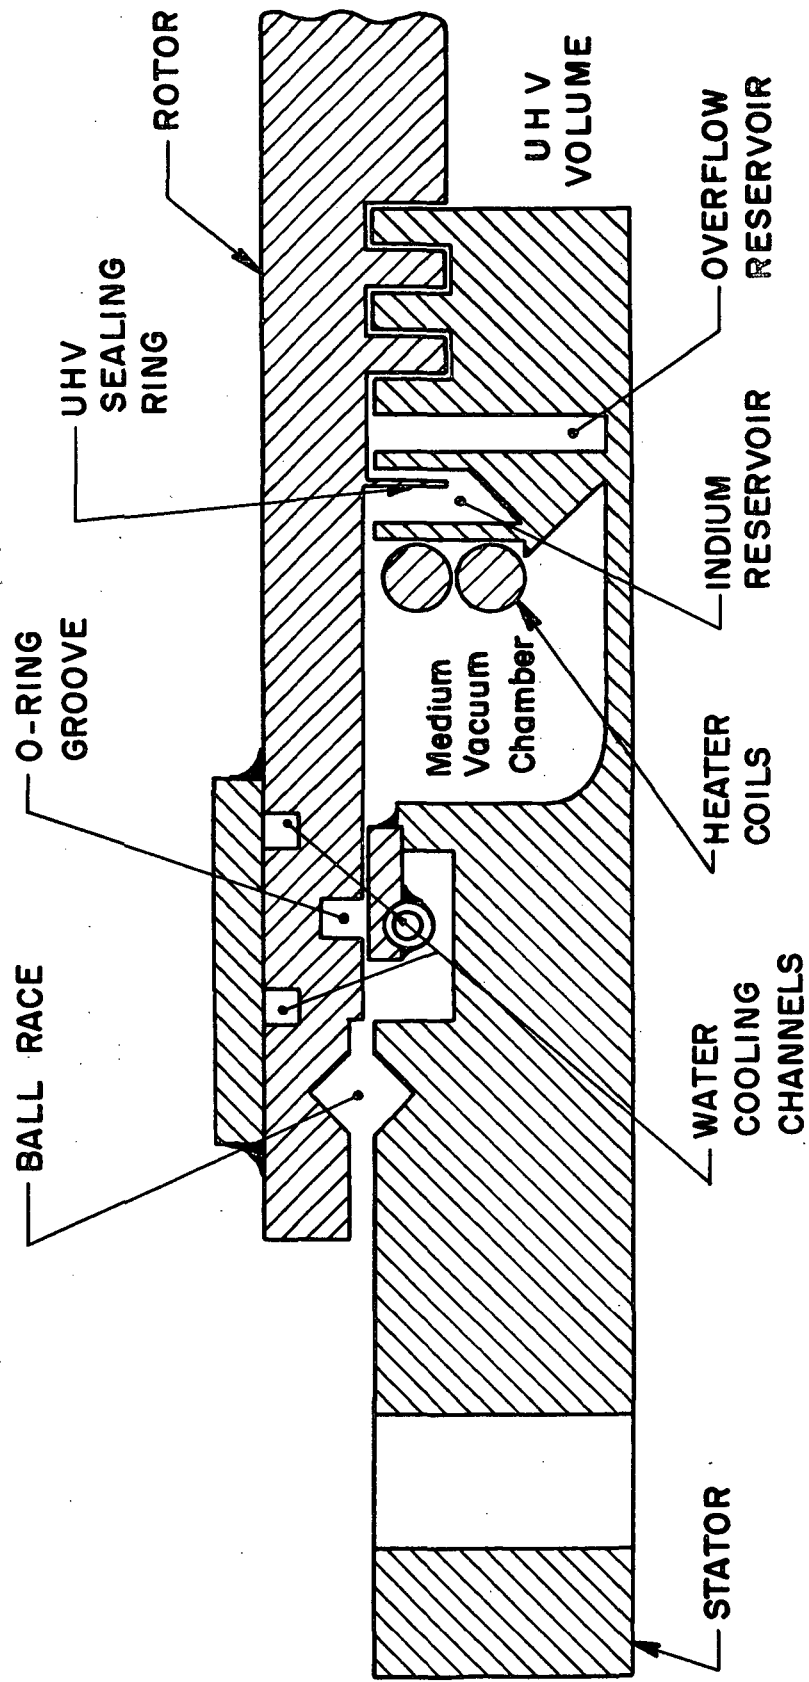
DETAILED VIEW OF THE VACUUM SEALS OF THE UHV ROTATABLE FLANGE
